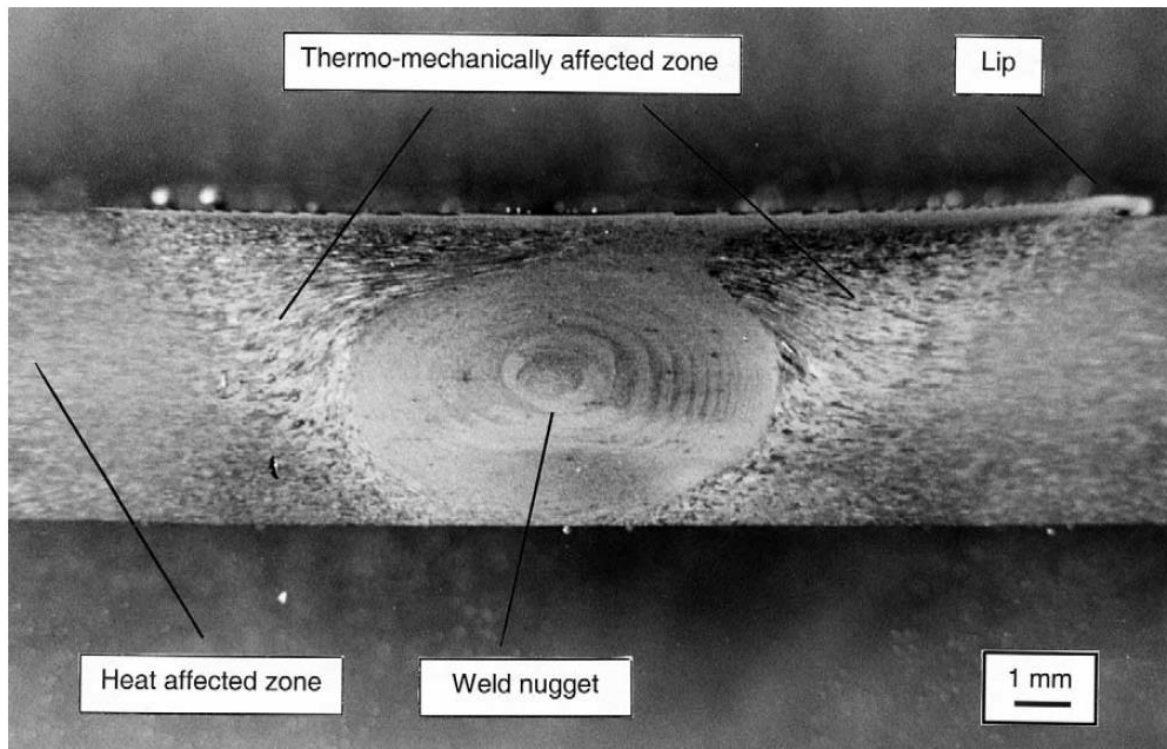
Cross section of welded joint with Heat Affected Zone (HAZ) [5]
